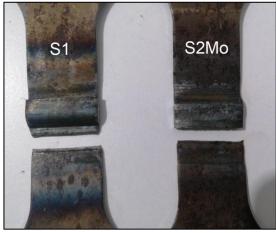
Tensile test specimens. S1 specimen (left), S2Mo specimen (right)
